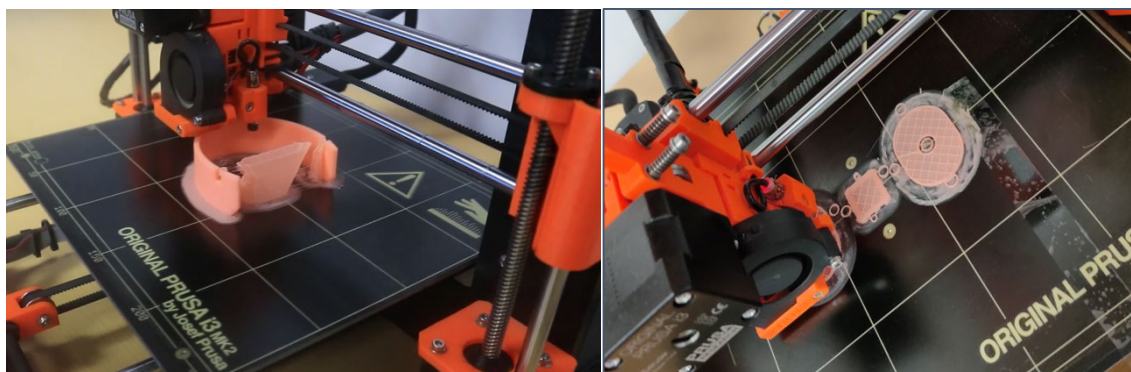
3D Printing of prosthesis parts using Prusa FDM machine
